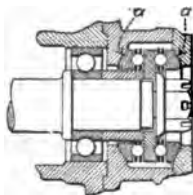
Combined Annular and Thrust Ball Bearing.
